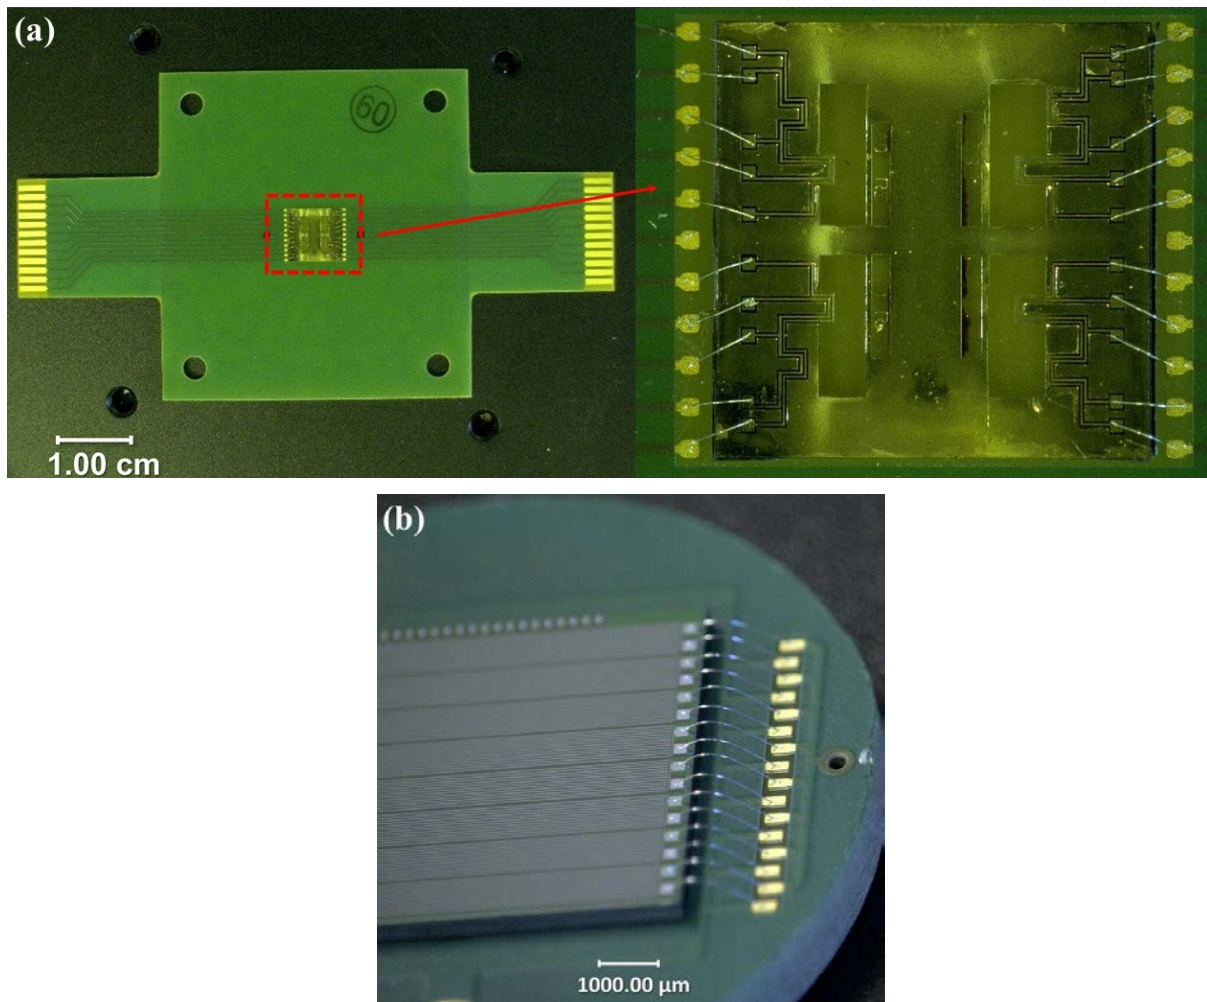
(a) Fully packaged prototype and optical microscopic view of wedge bonded 3C-SiC cantilevers on PCB, using 25µm diameter aluminum wires and (b) optical microscopic view of wedge bonded CMUT on PCB.
